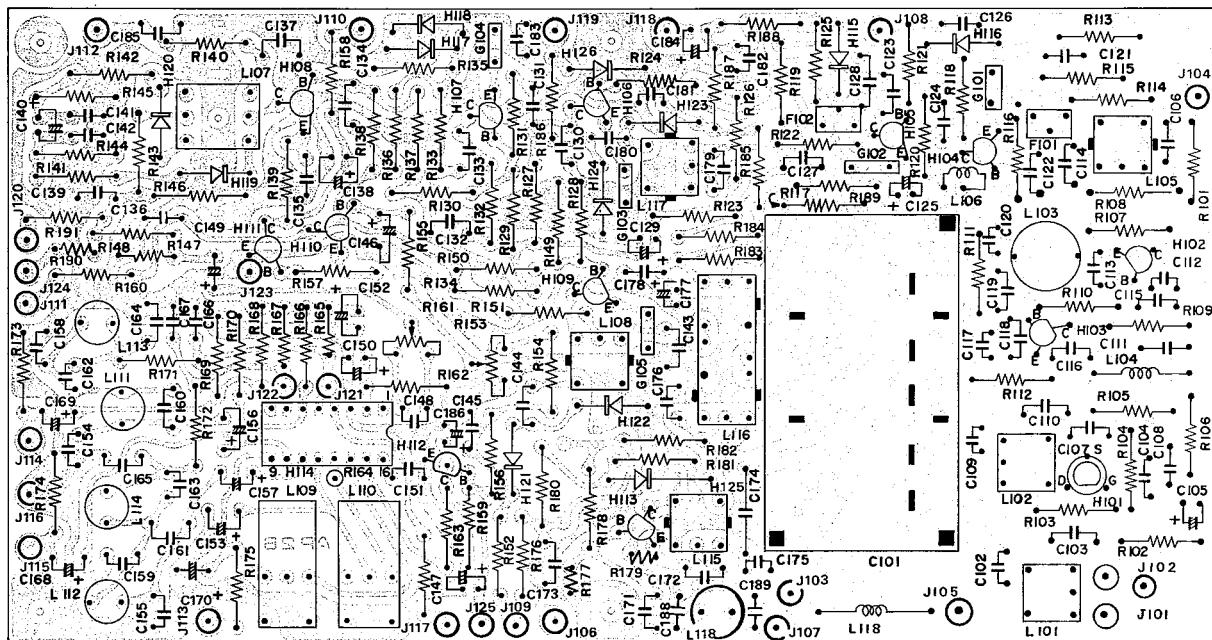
FM and AM Tuner Assembly P100 Component Locations
